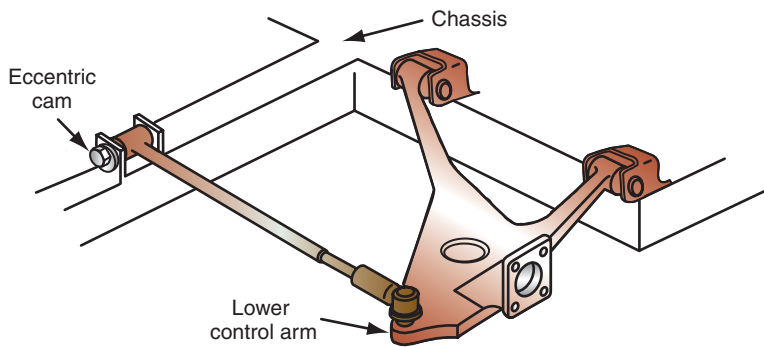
Cam bolt for rear wheel toe adjustment.
